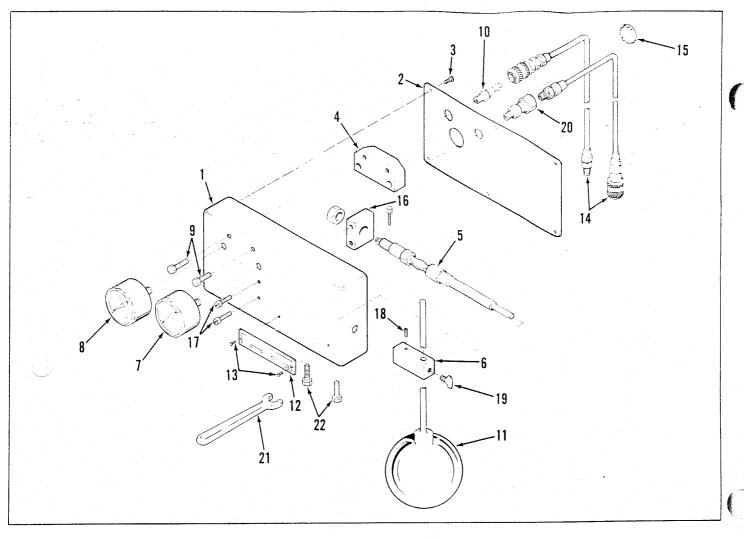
Models 30-103 and 30-104 Level Controls - Exploded View
